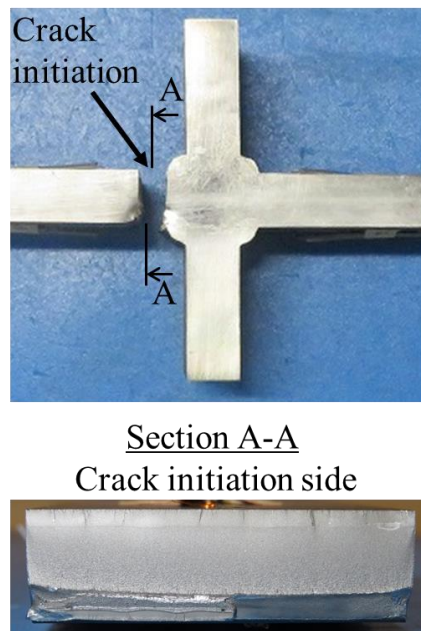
Typical fatigue crack initiation point ($t = 16$ mm).
